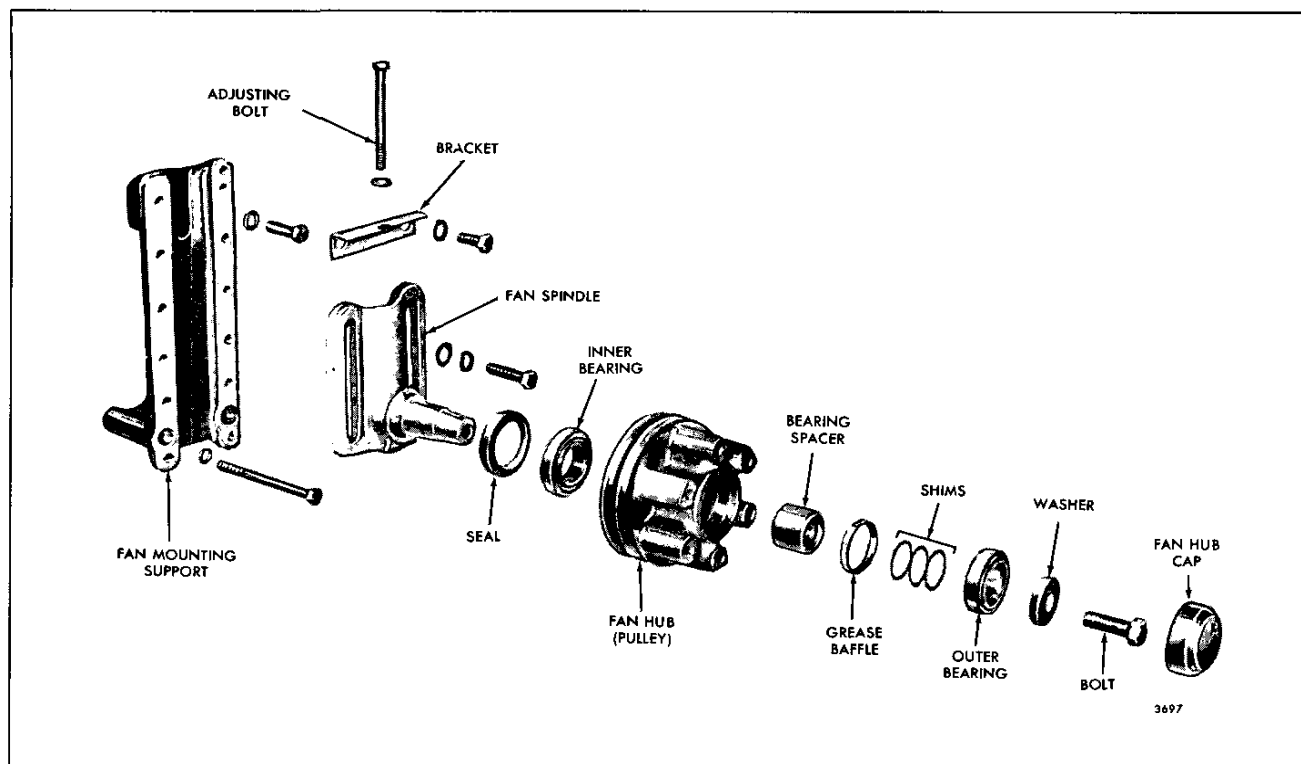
Typical Fan Hub and Spindle Details and Relative Location of Parts (6V and 8V Engine)
